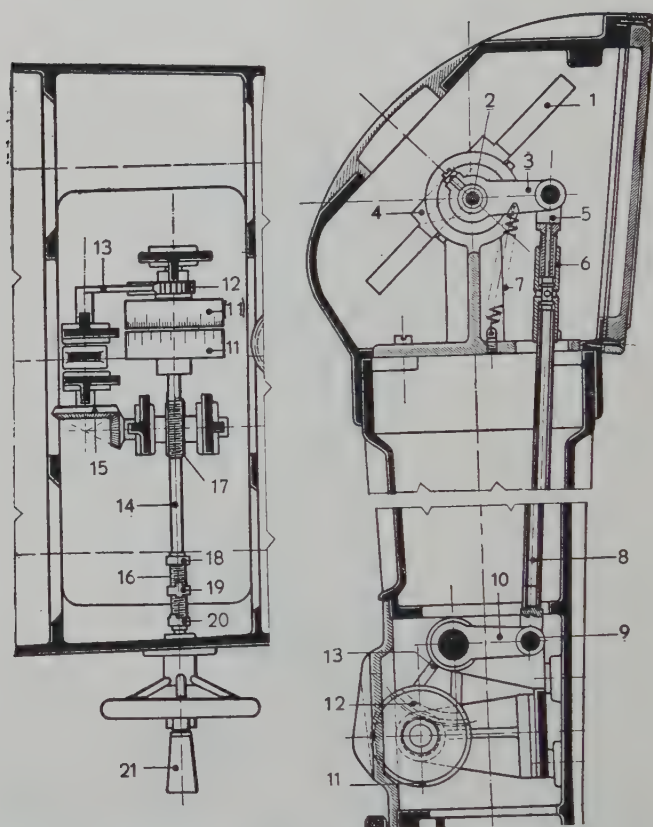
Mirror shifting by parallel gear drive. The drum bears linear graduations
